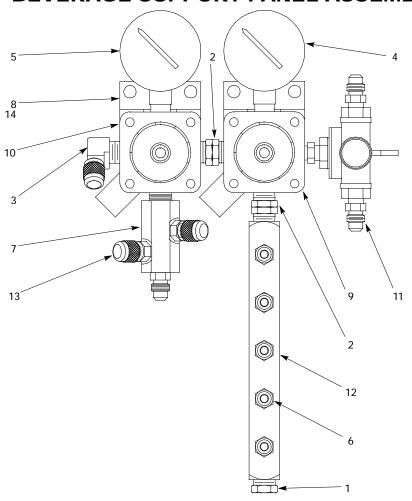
REGULATOR AND CHANGEOVER ASSEMBLY
